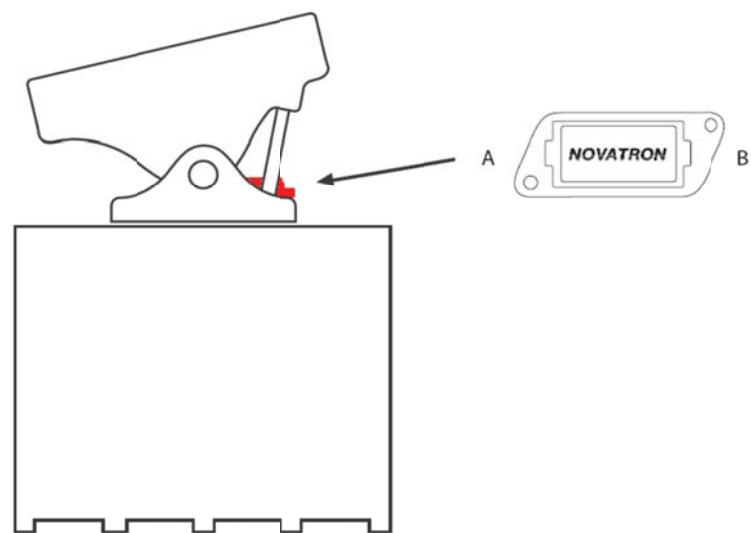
Tilt bucket sensor on a tilting quick coupler (mounting orientation B4)
